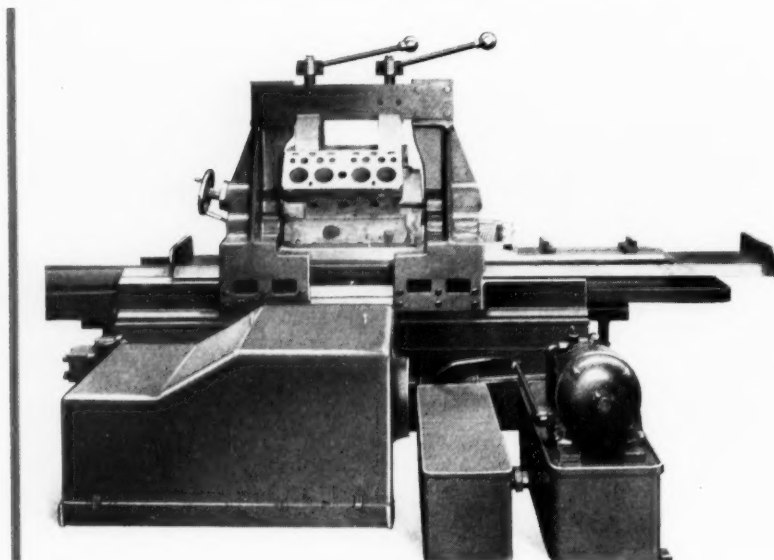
Horizontal Broaching Machine for Finish-broaching the Bearing Locks
